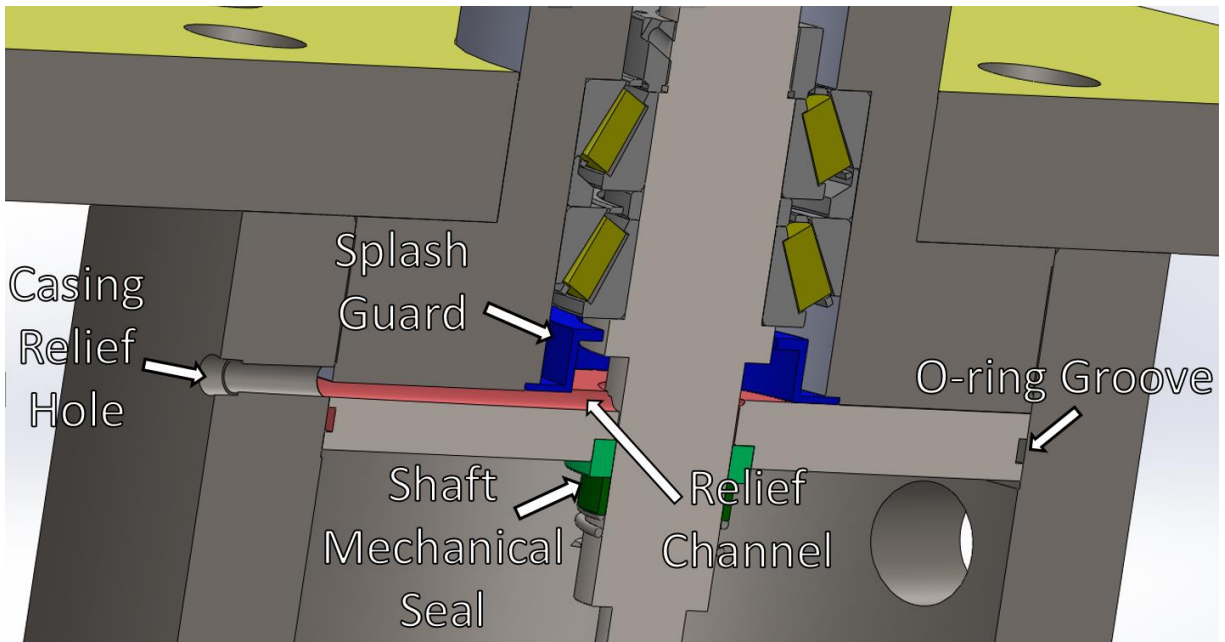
Test bearing and slave bearing chamber leakage isolation configuration
